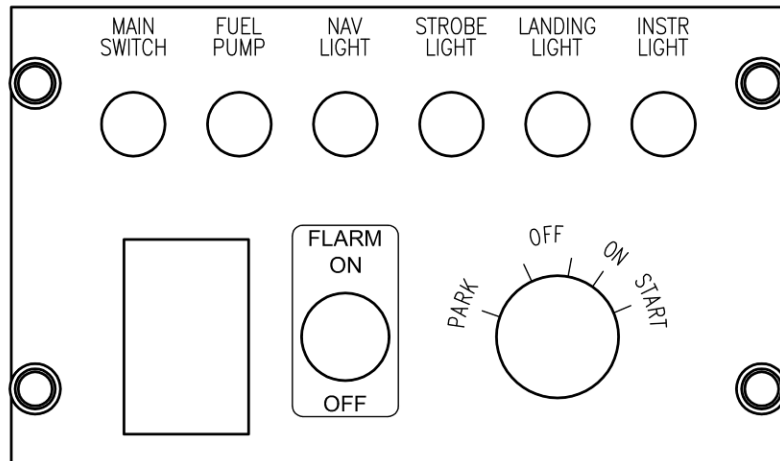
Switch Panel with new drilled hole and placard "FLARM ON OFF"
